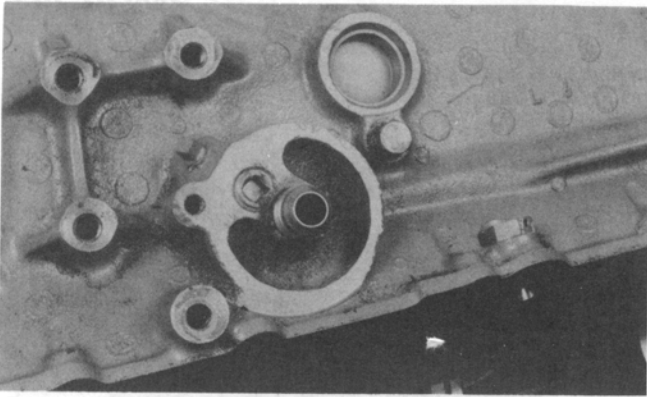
Plug oil filter bypass and install fitting in oil filter inlet for dry sump system.
